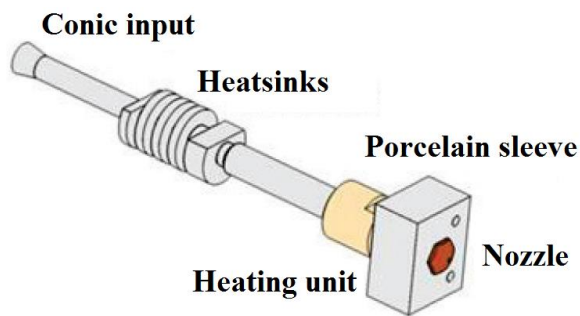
Example of a nozzle head assembly (Kun 2016, p. 209).
